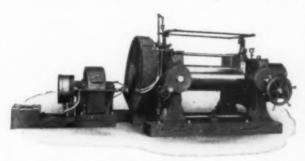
" x 60" Celluloid Sheeting Mill with Farrel-Sykes Gear Reduction and Pneumatic Clutch Brake.
